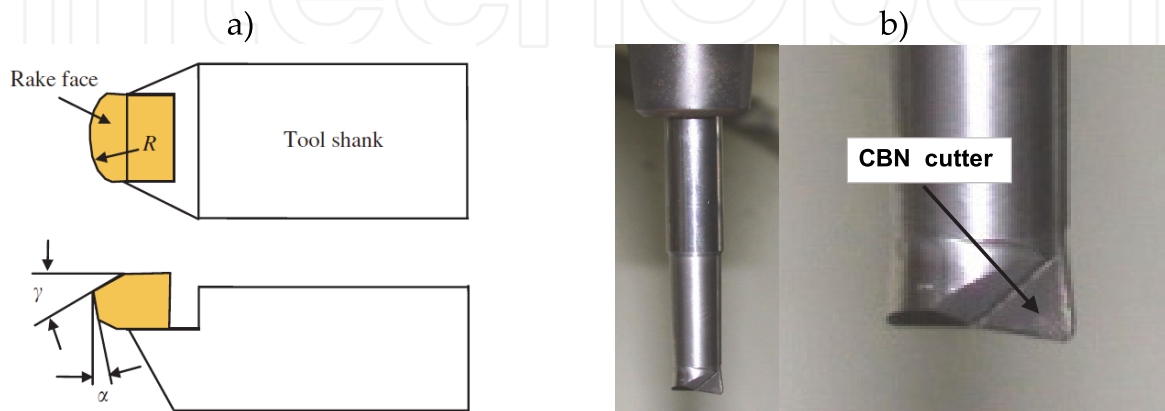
Tools applied in machining of carbides: a) diamond turning tool [15], b) CBN torus end mill [16]
